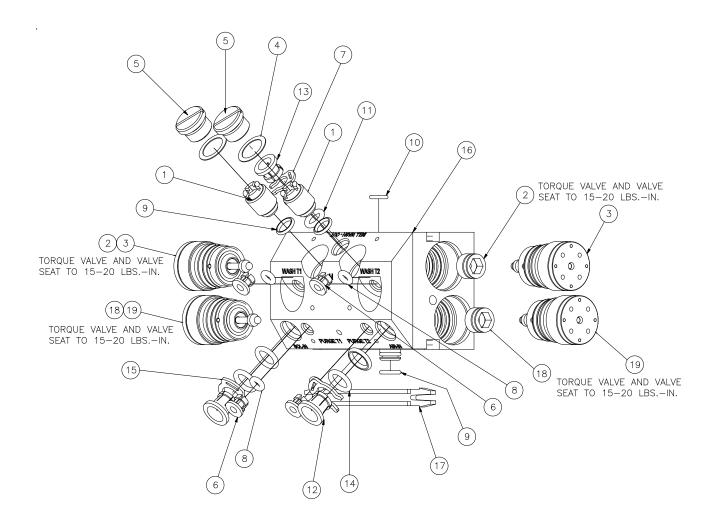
A10717 (Metric) & A11080 (English) Bell/Block Wash Assembly
